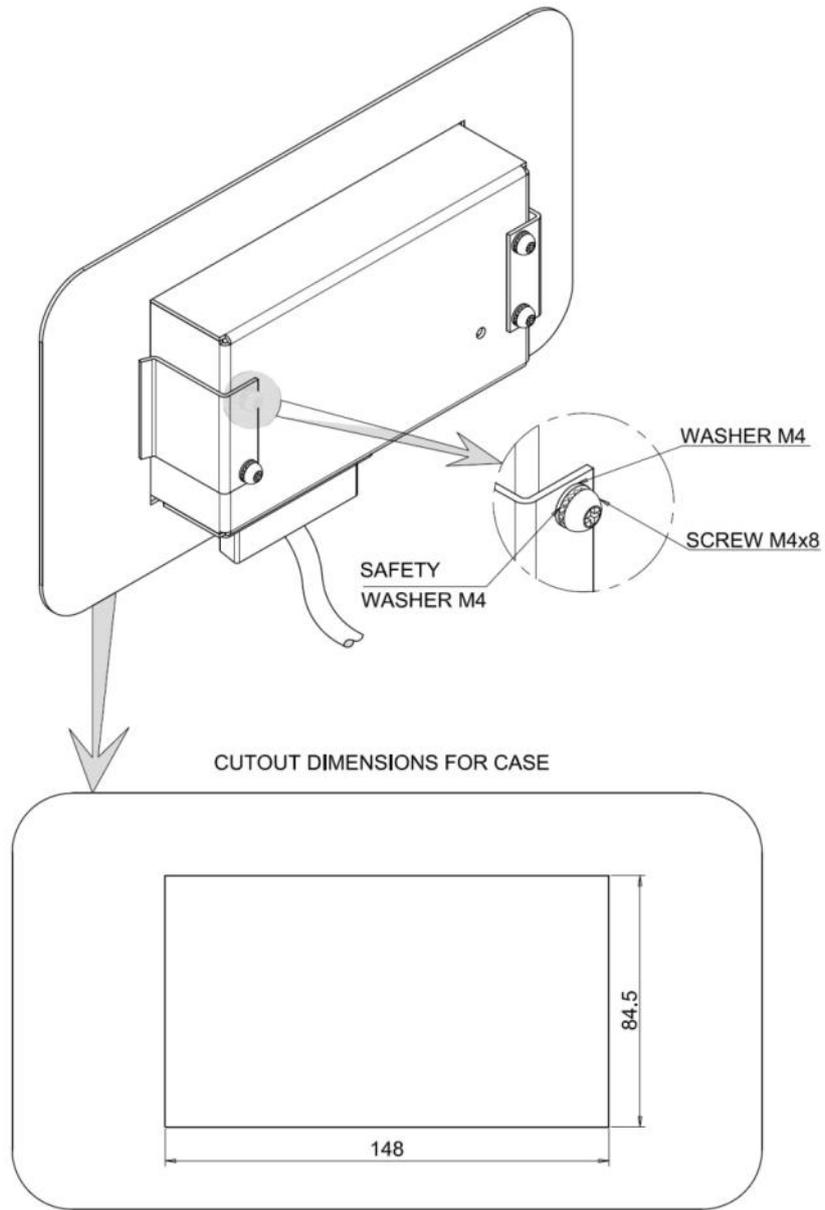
Remote Key Pad - Mechanical Installation and Cut-out Dimensions
